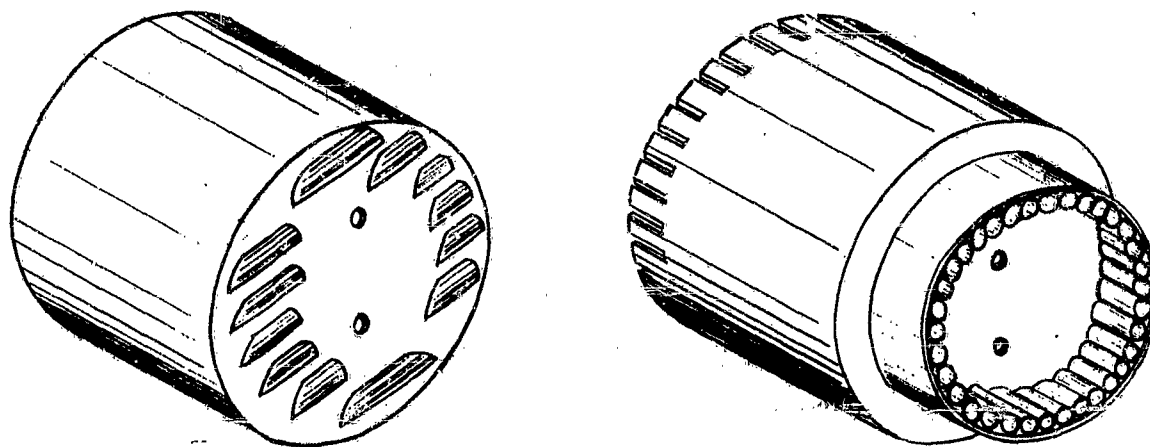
A Section of Motor-Alternator Shield Before and After Modification
